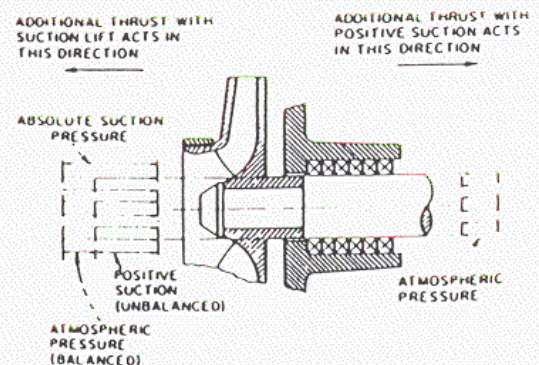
Axial thrust problem with single-suction overhung impeller and single stuffing box
